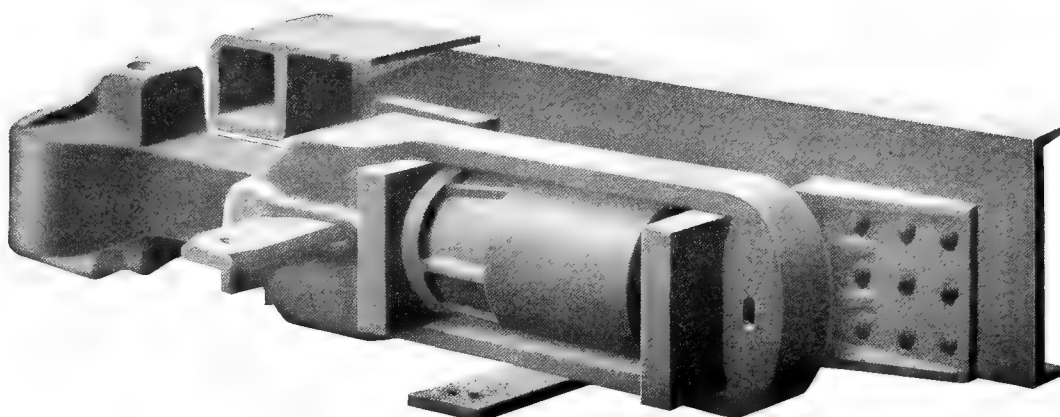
Buckeye Cast Steel Keyed Yoke for Friction Gears.
